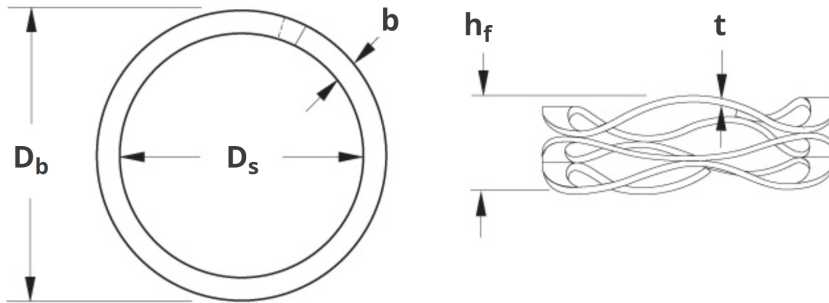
Technical drawing of the C037-L1 spring used in the final prototype. [28]
